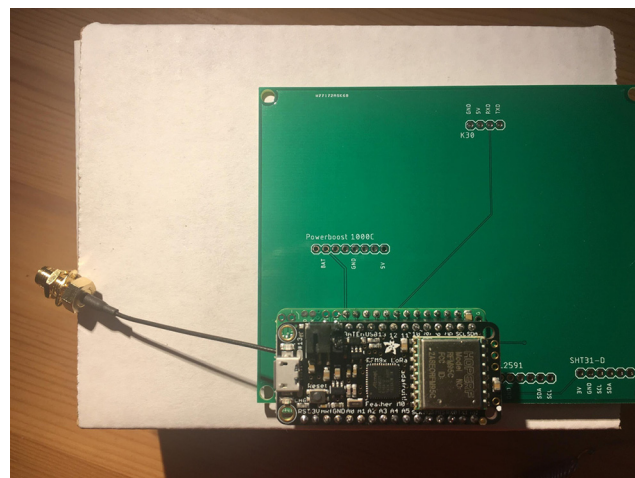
The top view of the PCB after soldering the Data Logger with the RTC Board and stacked Development Board.
